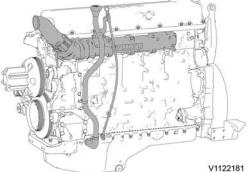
Inlet manifold with preheating coil, oil filler pipe, oil dipstick.
